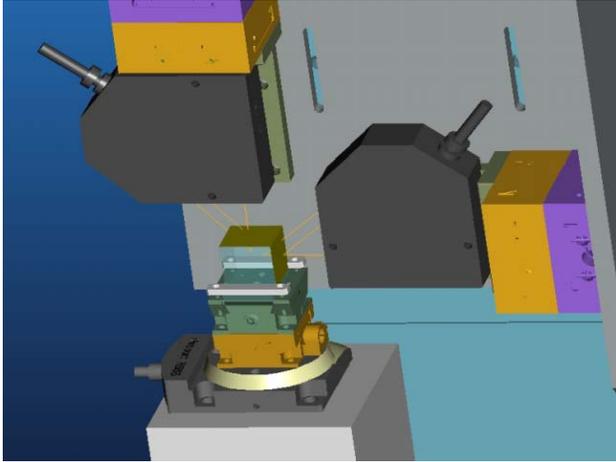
Reference surface and laser displacement sensor setup at the end of the cradle.
